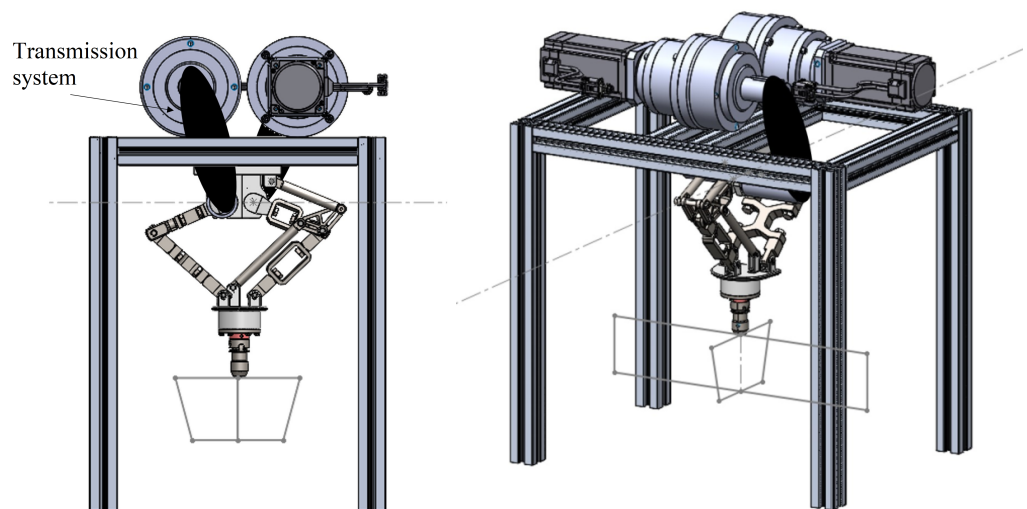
Hypothesis 2 motor–reducer configuration: motor positioned horizontally at the top of the structure with a linear reducer.
